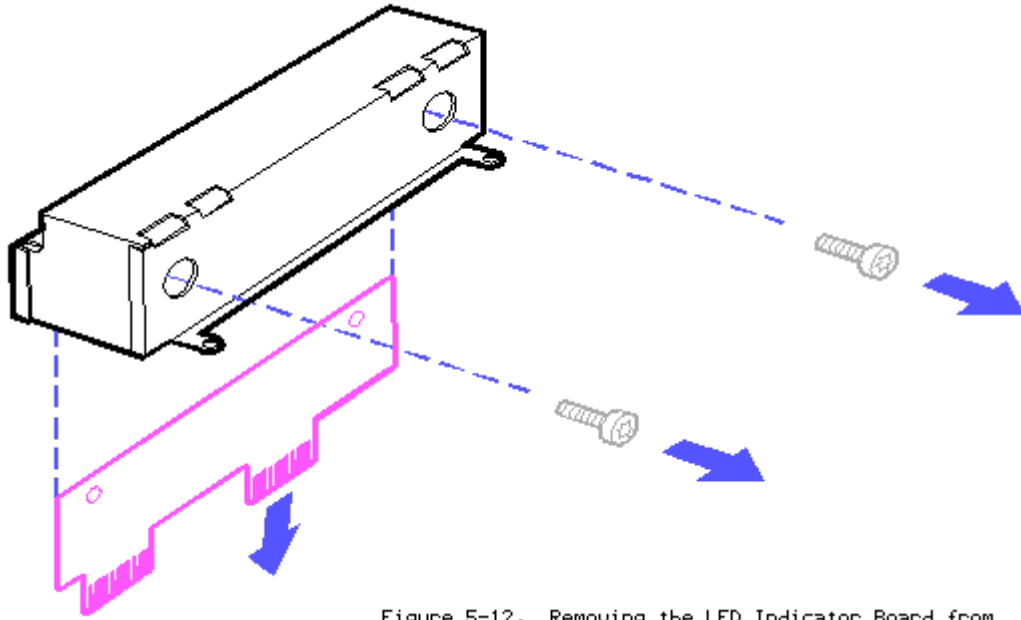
Removing the LED Indicator Board from the COMPAQ SLT 386s/20
